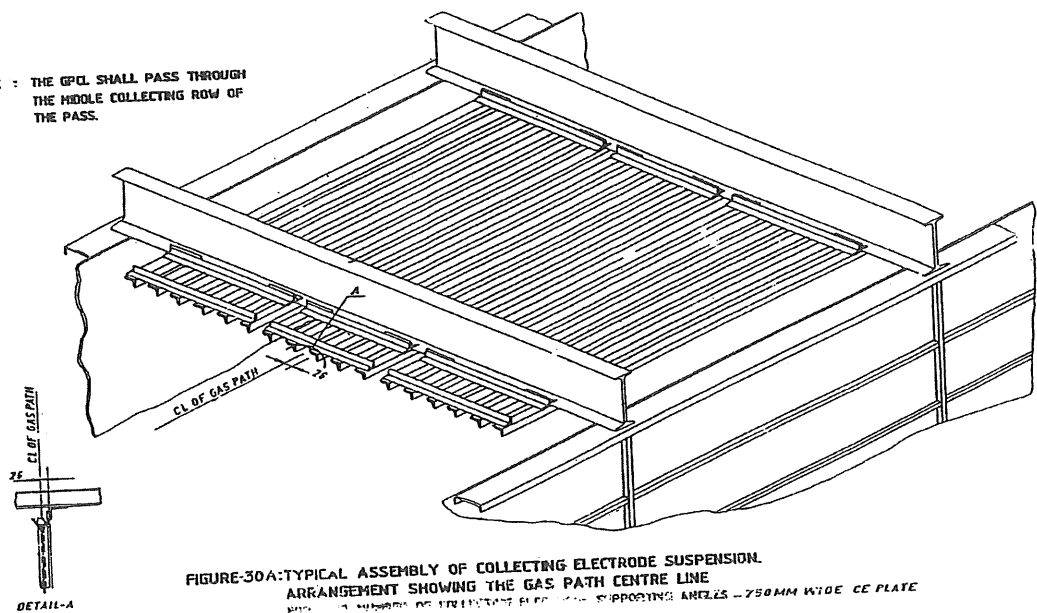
A: TYPICAL ASSEMBLY OF COLLECTING ELECTRODE SUSPENSION ARRANGEMENT SHOWING THE GAS PATH CENTRE LINE FOR ODD NUMBER OF COLLECTING ELECTRODE SUPPORTING ANGLES - 750 MM WIDE CE PLATE
